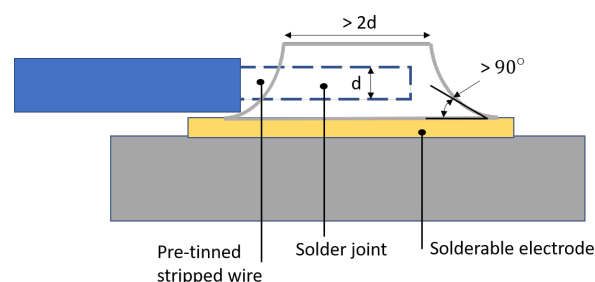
Schematic drawing of a solder joint with basic guidelines for reliable soldering connection. Adapted from: [17]
